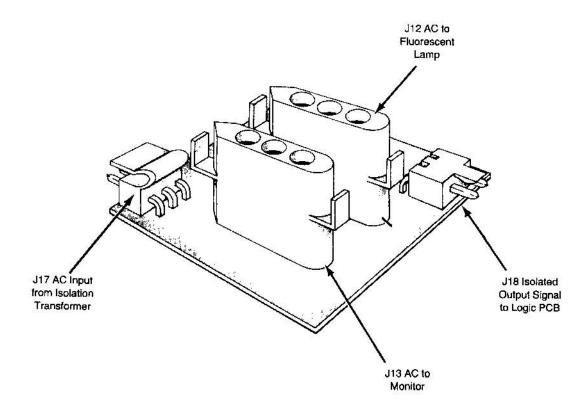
AC Sense PCB Assembly (006-8006-10-0A)
